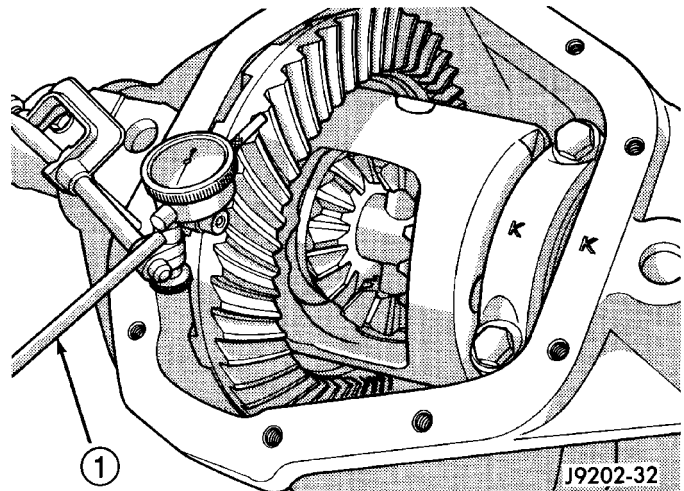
RING GEAR BACKLASH MEASUREMENT
